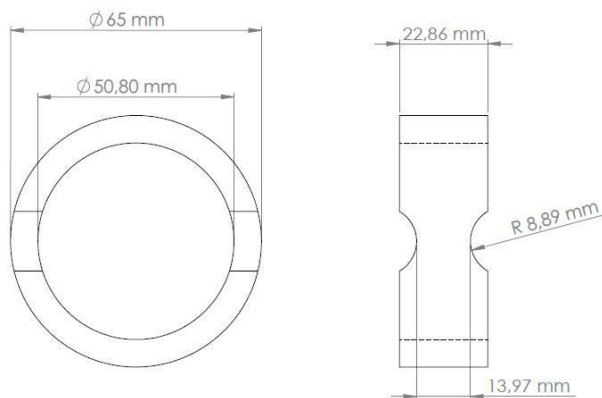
Geometry of the ASTM D2290 test specimen [32].
